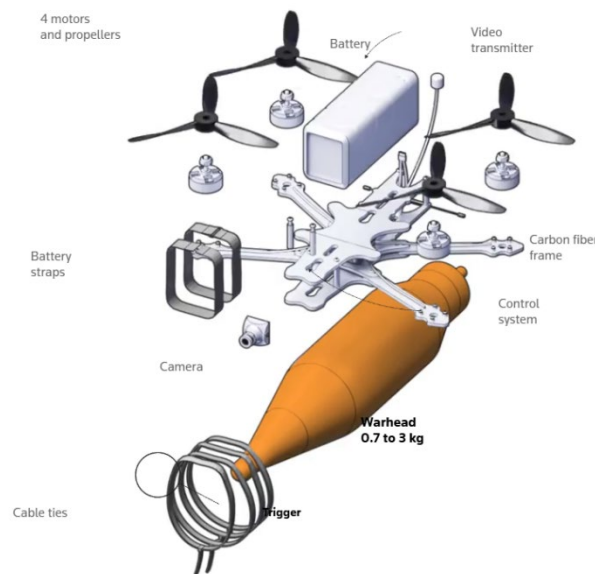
Exploded View of Drone Assembly. Source: Allen et al. (2025).
